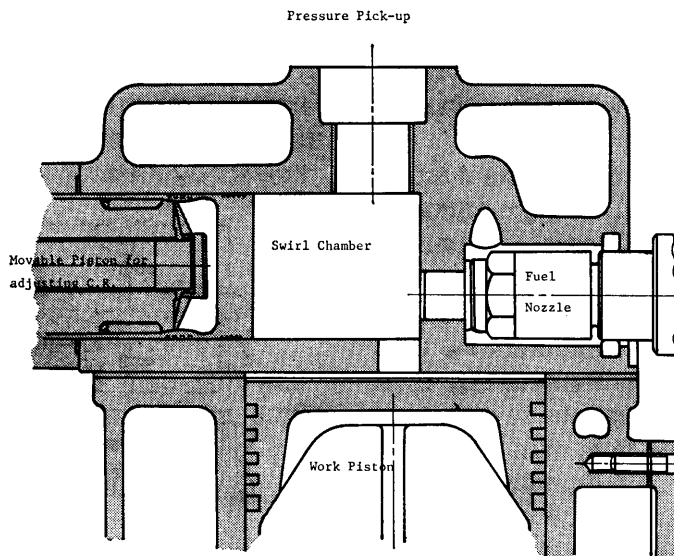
Cross Section of Cylinder Head (Pre-combustion Chamber Diesel Engine: ST-95).
